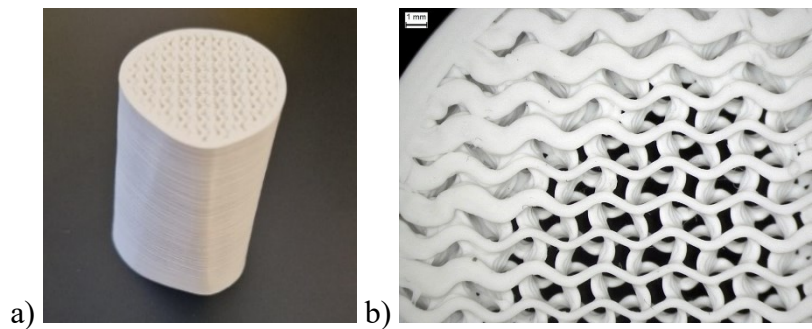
a) The printed graded component and b) the top view of the first 10 layers
